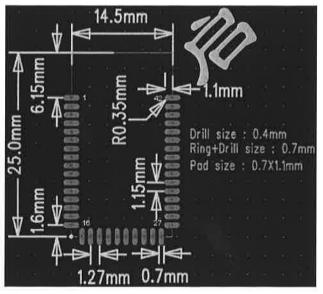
Module package dimensions Dimesion:25mm(L)x14.5mm(W)x0.8mm(H)
